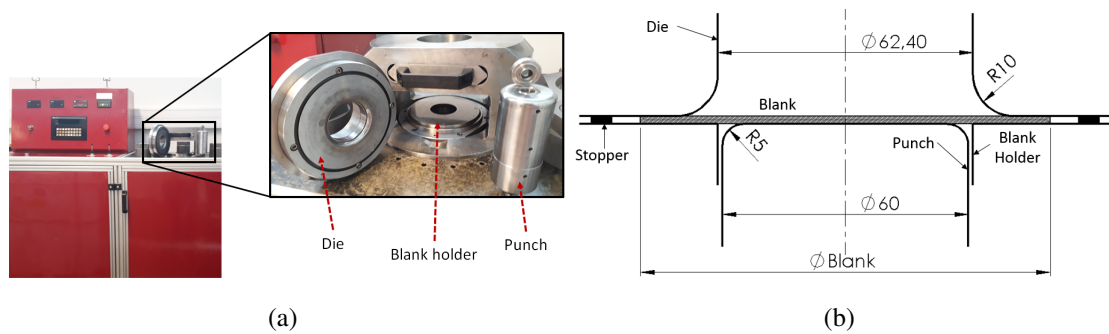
a) Deep drawing cylindrical cup experimental setup; b) tool dimensions in mm.
